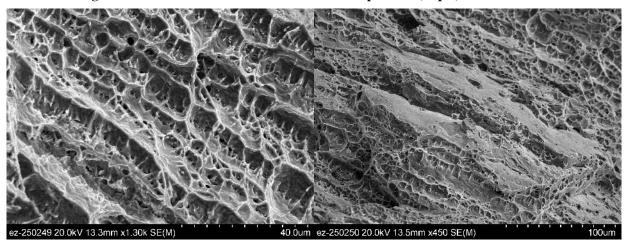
Fracture surfaces of cross-weld tensile specimen (Bottom 2) from W4 weld
